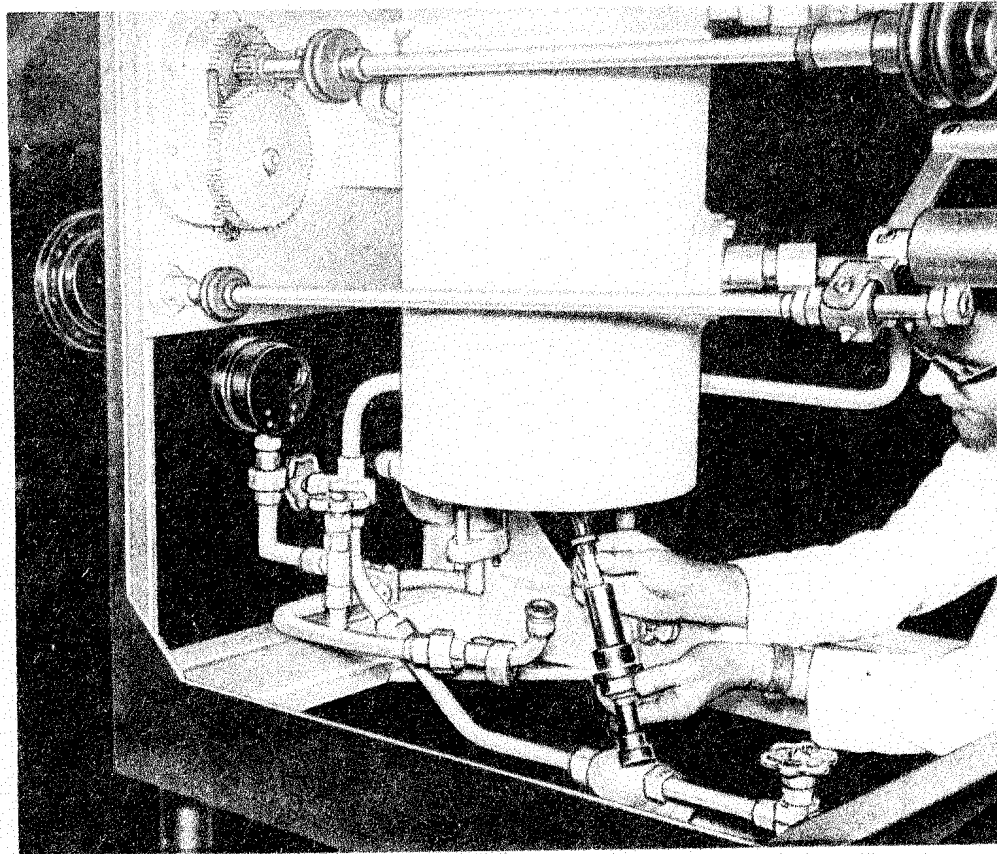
SHOWING EJECTOR ASSEMBLY AND PUMP TRANSMISSION ASSEMBLY
